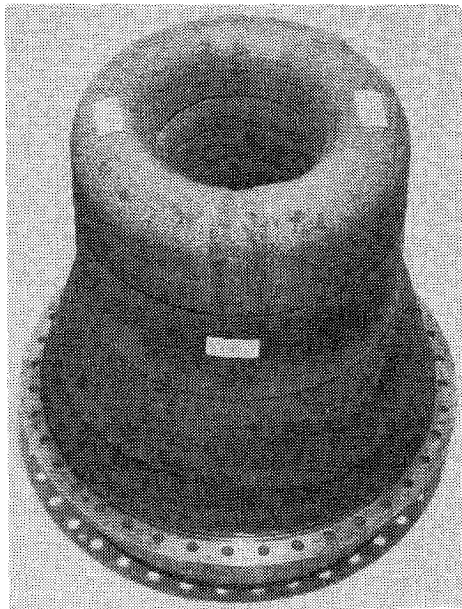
Post-test inlet view of SAA-2 nozzle assembly.
